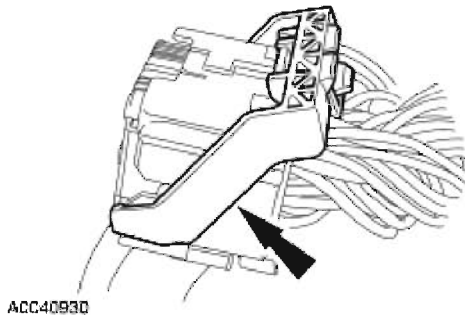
Disconnecting Large RCM Electrical Connector
